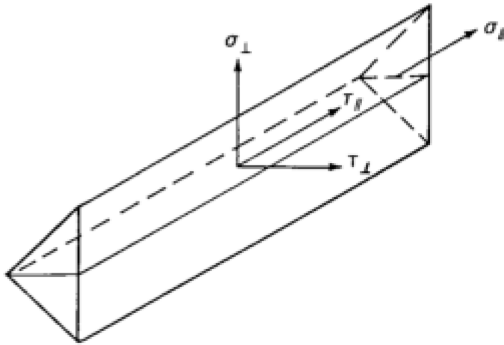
Stresses on the throat section of a fillet weld. (SFS-EN 1993-1-8 2005)
